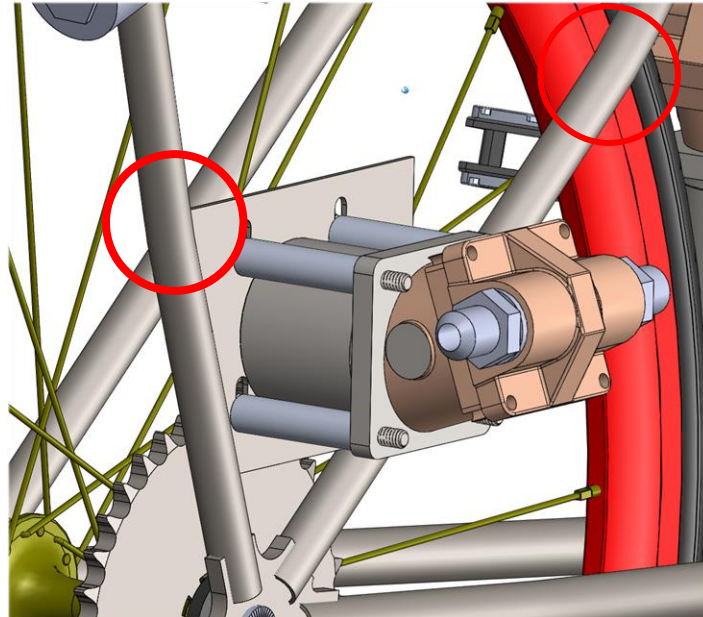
Image of rear motor attachment to rear vertical support tubes and seat stays with tube bends indicated with red circles
